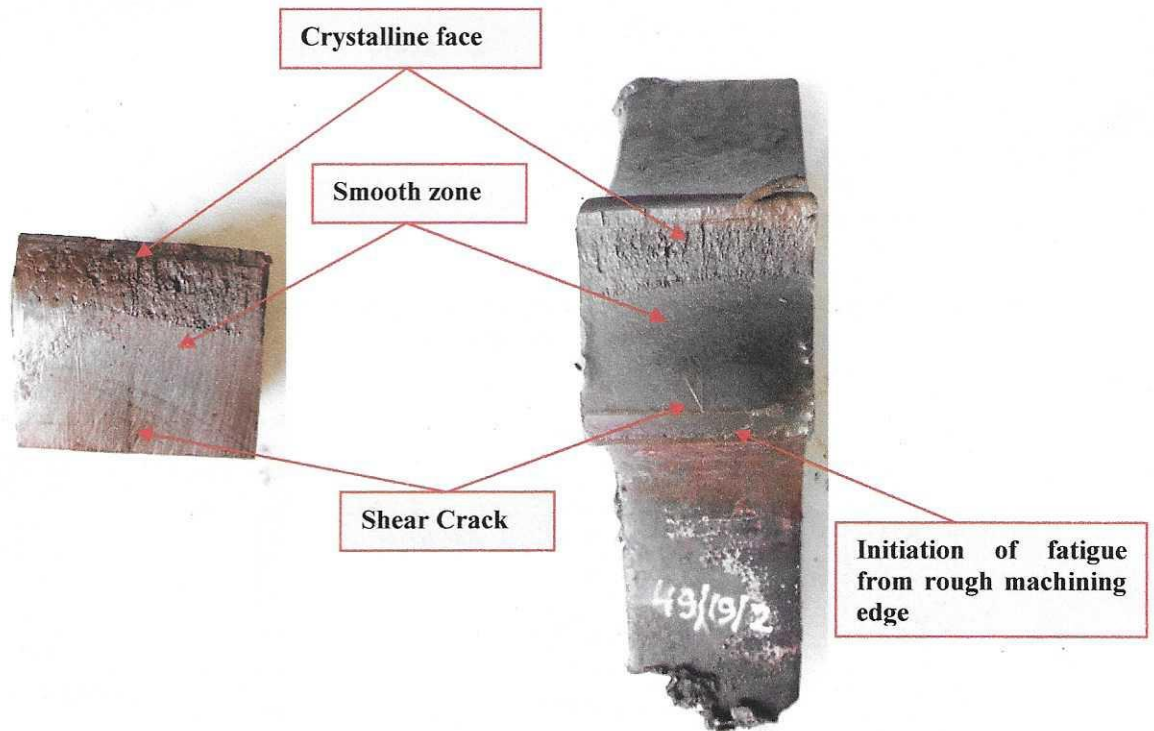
Photograph showing fractured location of LH & RH side traction motor-3 support lug pieces.
